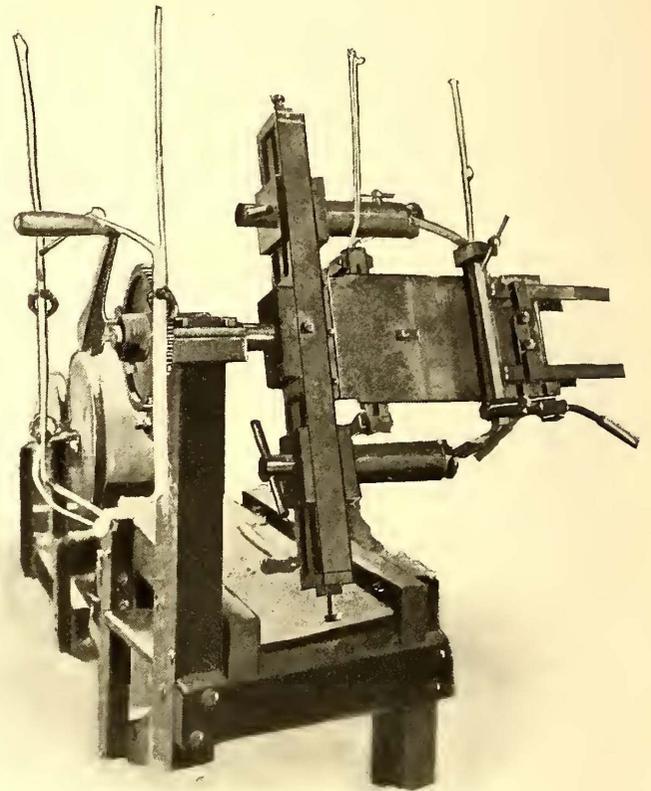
ARMATURE COIL WINDER FOR G. E. 57 AND OTHER MOTORS, COIL SPREAD READY TO TAKE OUT
